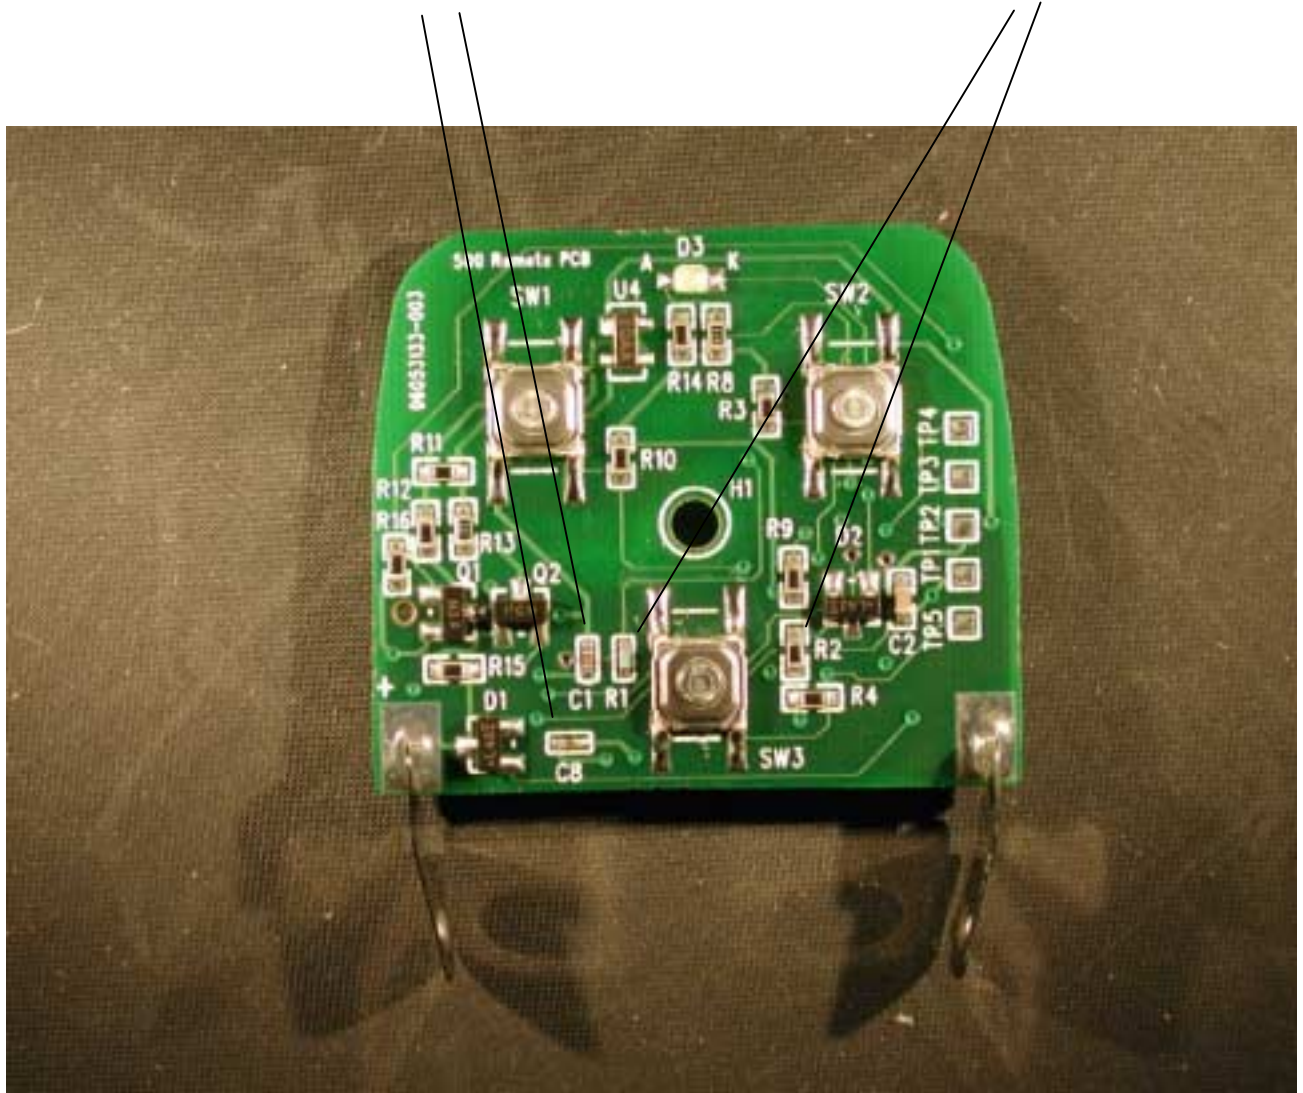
MMT500 508 Remote Transmitter PCBA - Back
